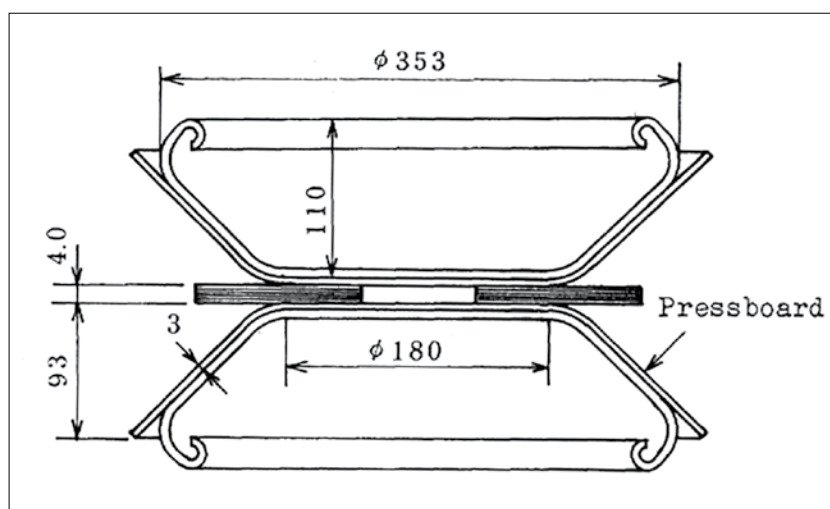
C. Test piece of oil duct insulation between barriers acc. to Ikeda et al.
